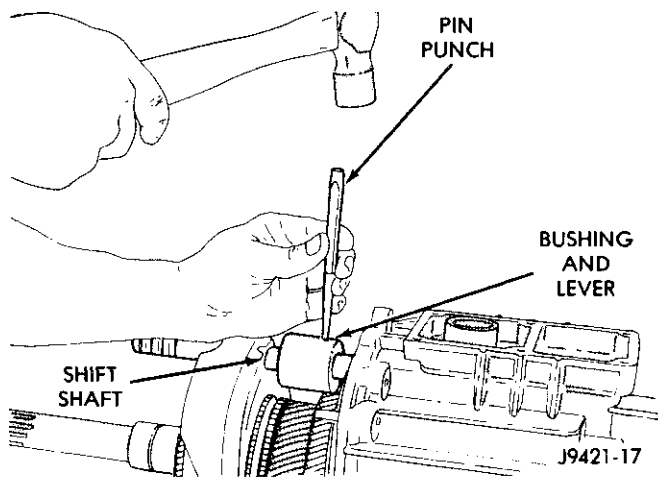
Removing Shift Shaft Lever And Bushing Roll Pin
